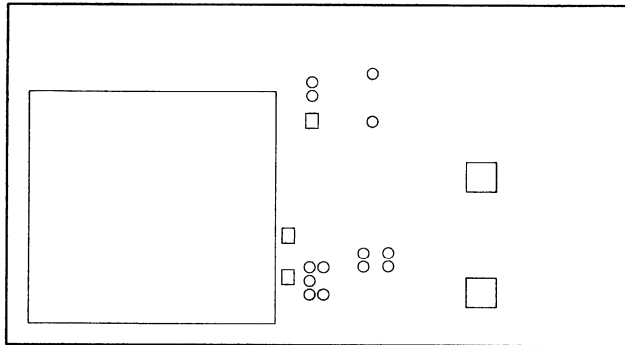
TRF1400 Receiver Test Circuit, Board Solder Mask — Top Side
